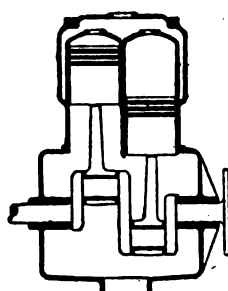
A two throw crank shaft for a two cylinder vertical engine, crank set 180 degrees.
